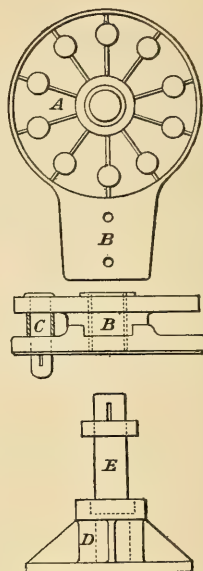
Eccentric and Pin for Paddle Wheel.
